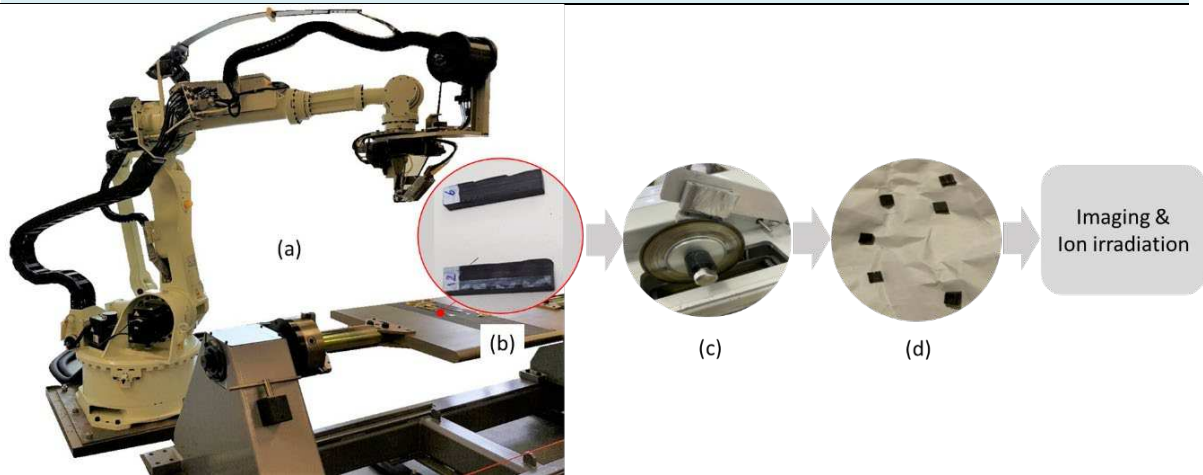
(a) Manufacturing Thermoplastic panels with AFP; (b) Small samples cut using diamond saw; (c) Low Speed Cutting Machine; (d) Coupon samples before polishing.
